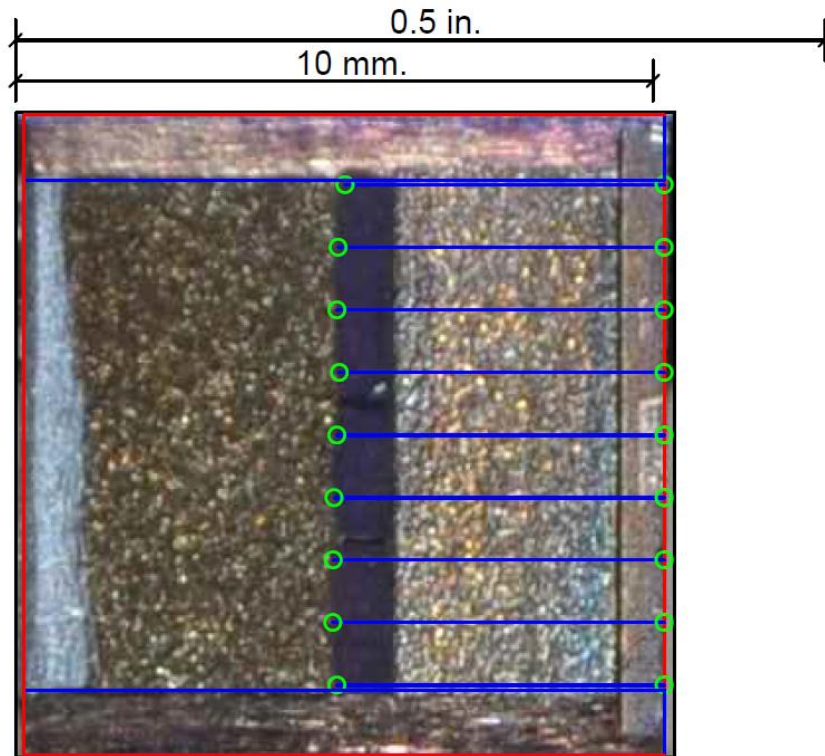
Specimen J15' Fracture Surface
